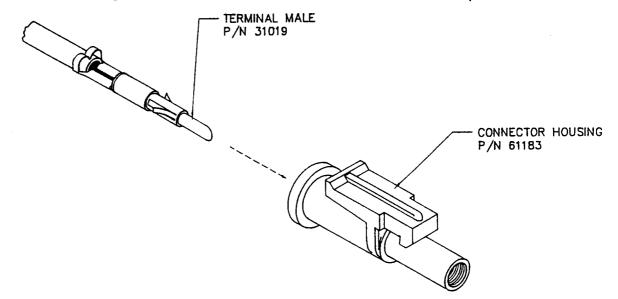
LAMP CONNECTOR (AL-5113) ASSEMBLY
